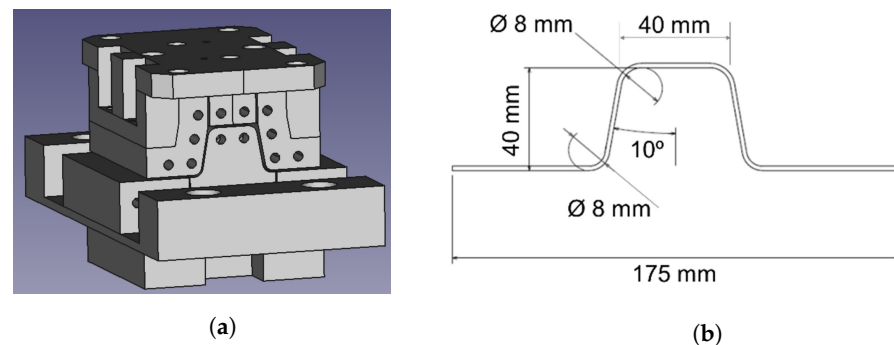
Pilot hot stamping environment. (a) Schematic of the tool assembly, including replaceable inserts; (b) Component geometry.
